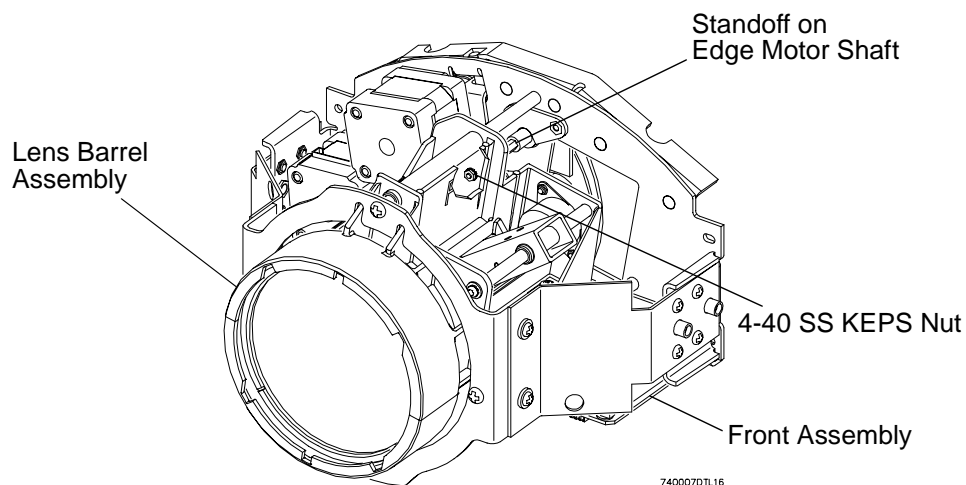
Removing Nut From Edge Motor Assembly Shaft
